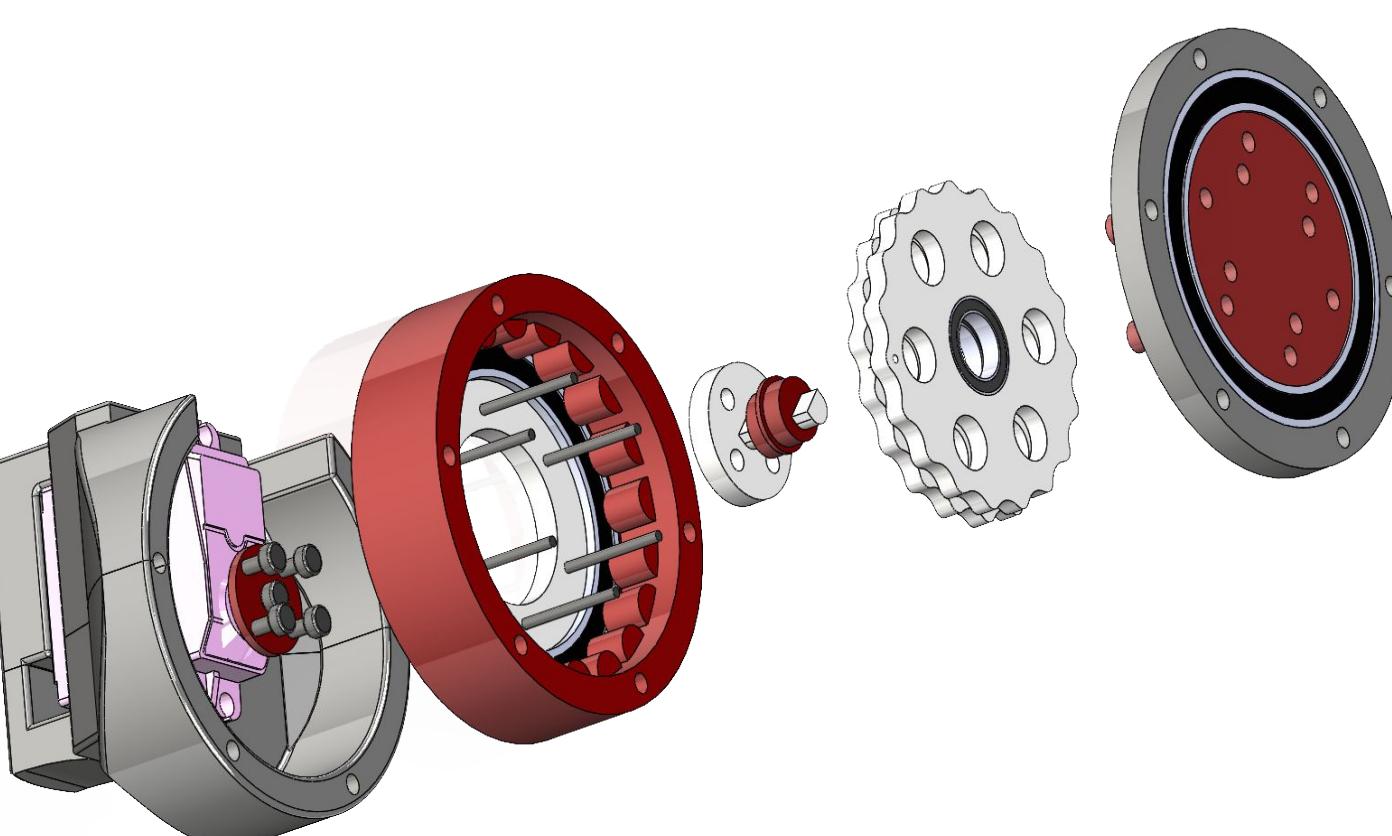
Exploded View of Cycloidal Actuator CAD model.
